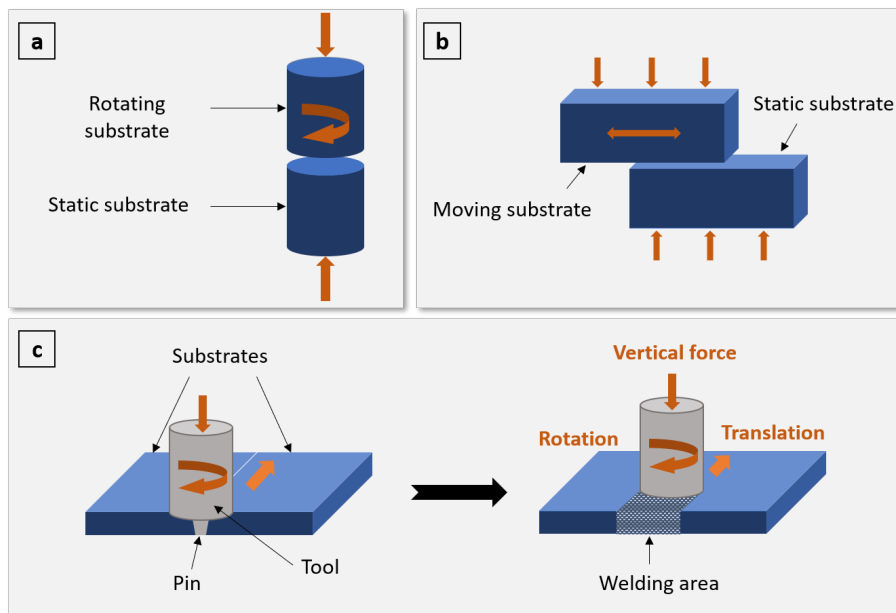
Illustration of friction welding processes: rotational welding (a), vibration welding (b) and friction stir welding (c)
